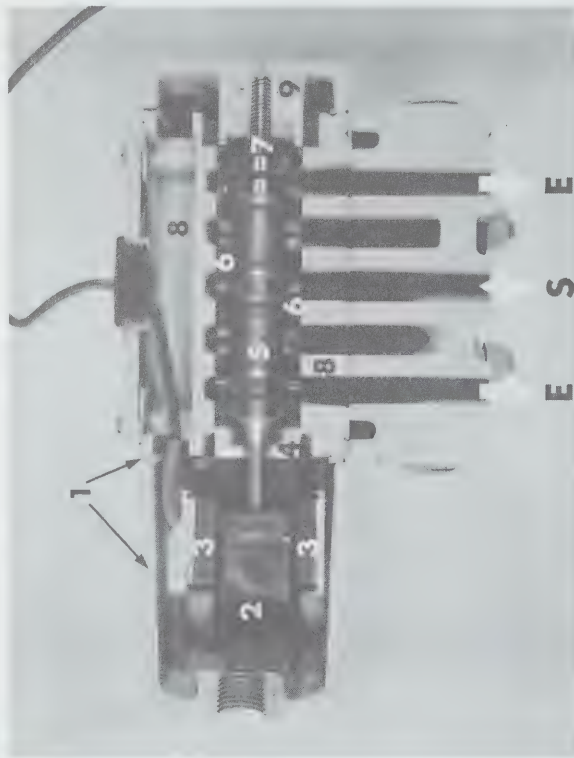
Cross-section of a valve, illustrating the internal mechanism. The same numerical identification as in photo 7 is used. The air supply and two exhausts are respectively arrowed as S and E.
